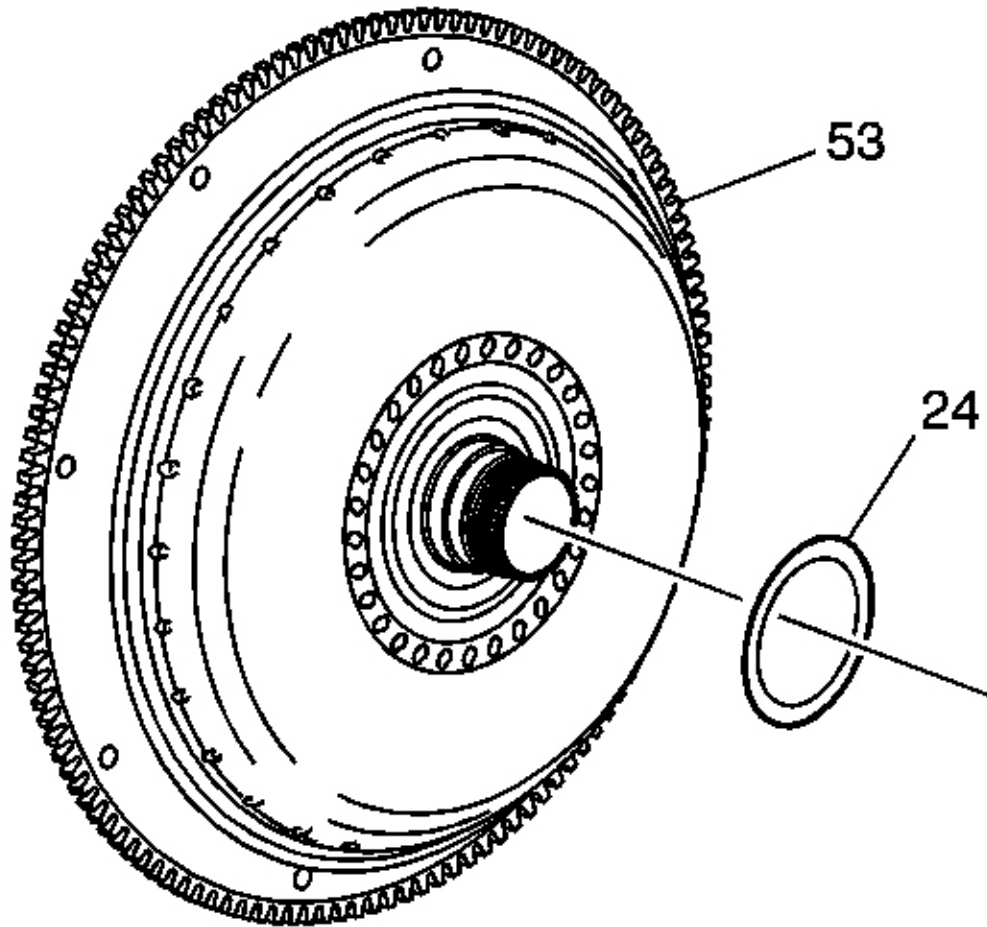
Torque Converter O-Ring Seal & Hub Of Torque Converter Assembly
